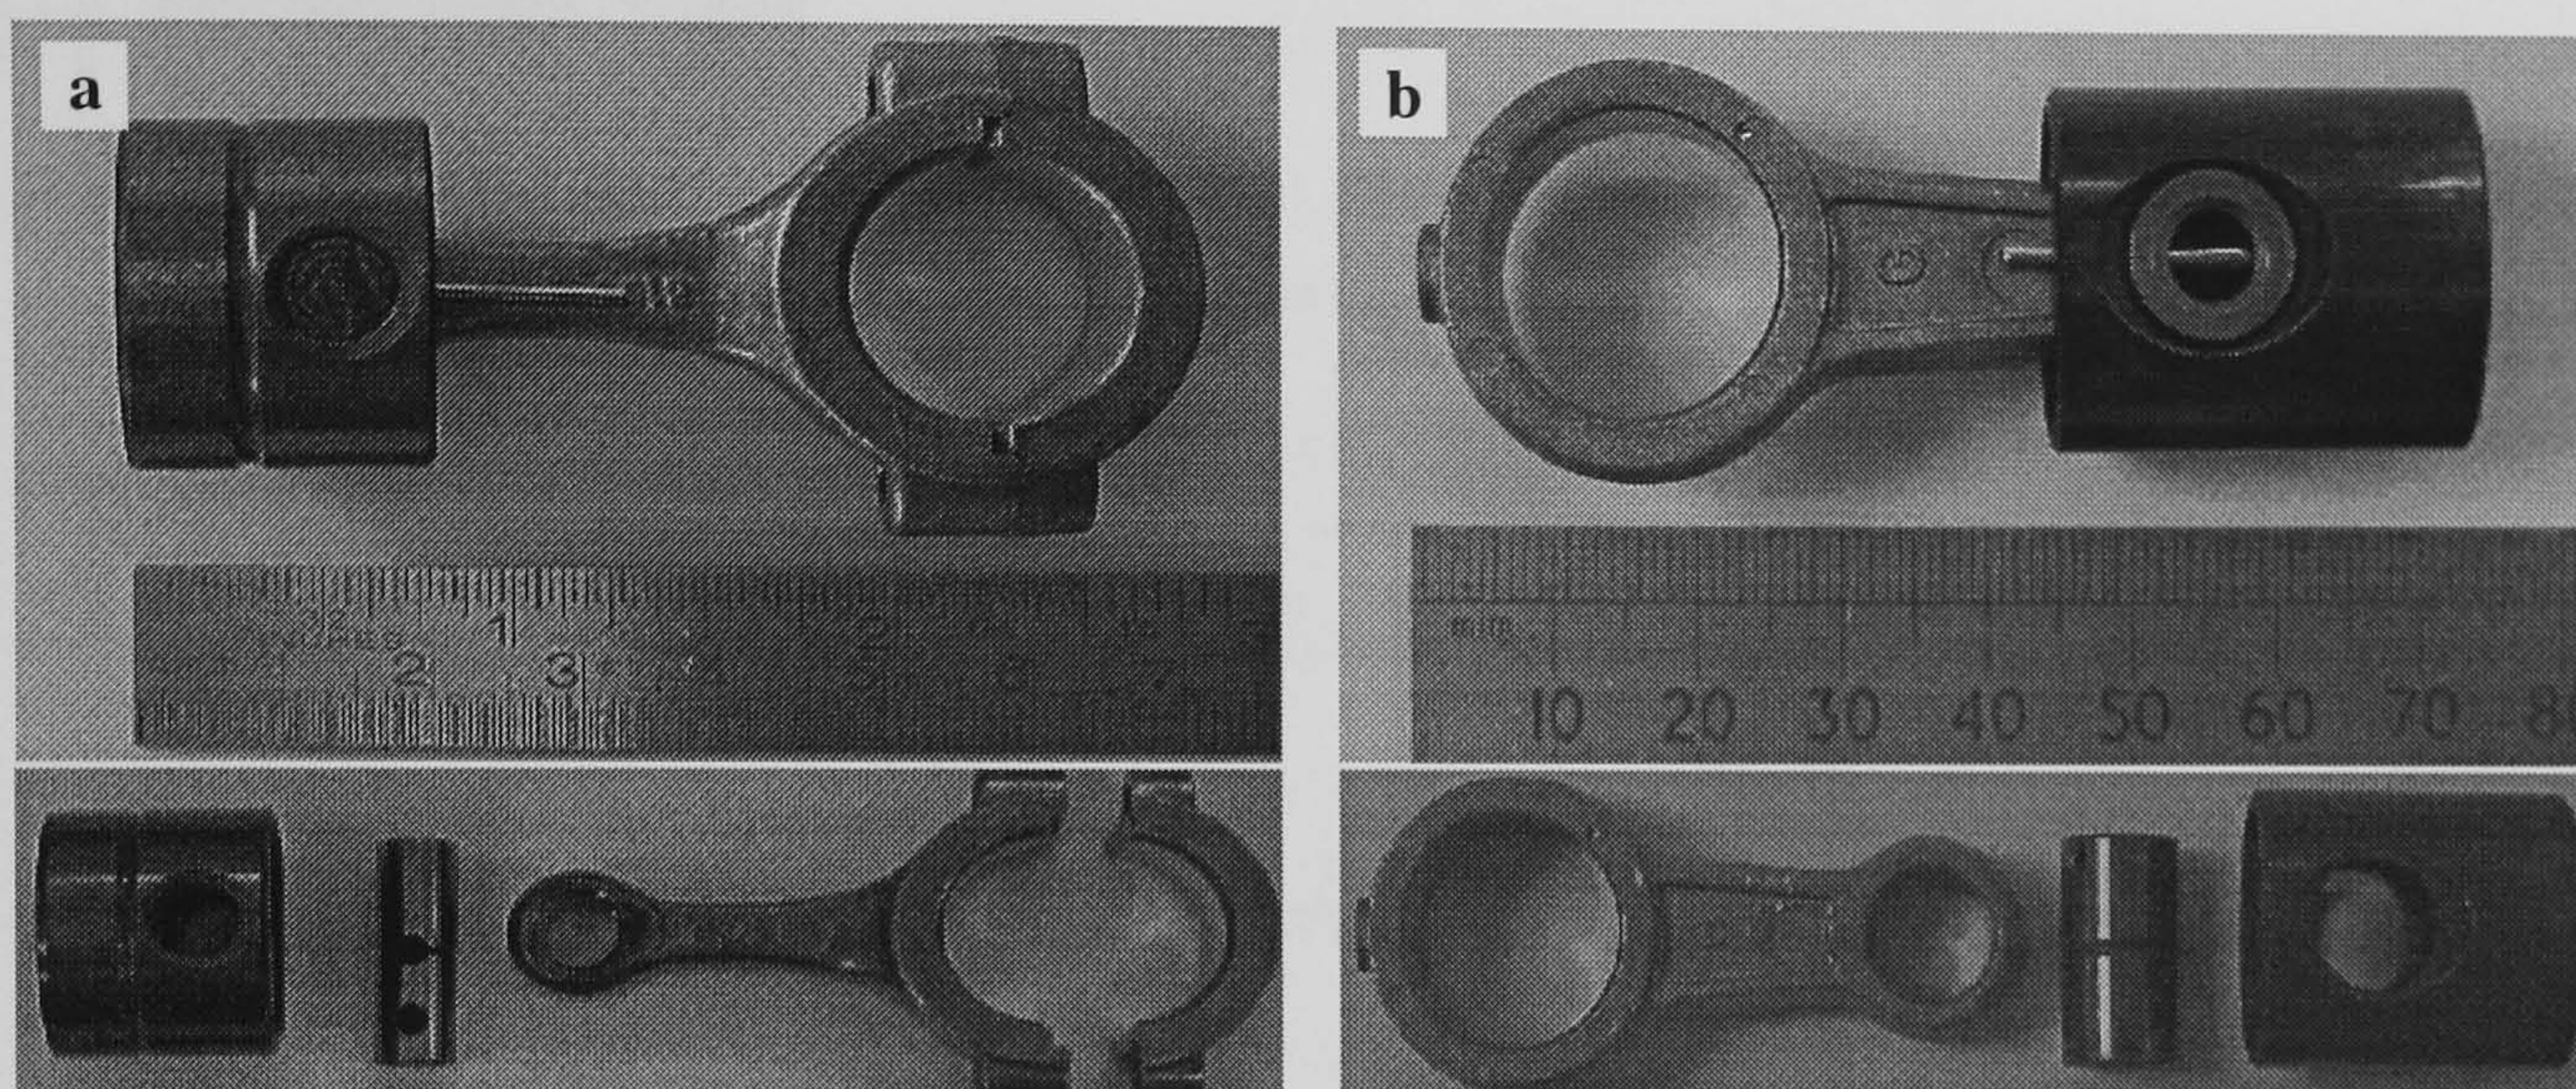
Piston and connecting rod assembly; (a) Type A and (b) Type B compressor
